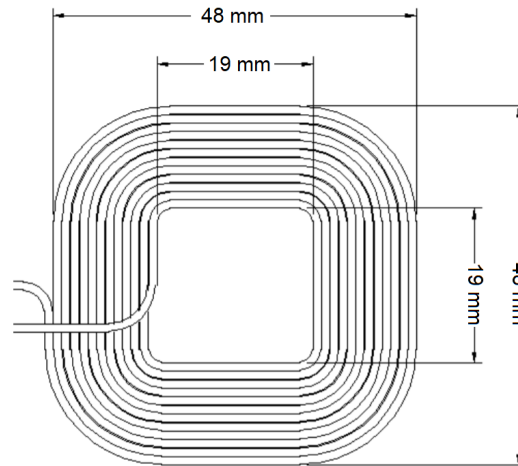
Dimensions of the transmitting coil for the MP-A2 standard [9].
